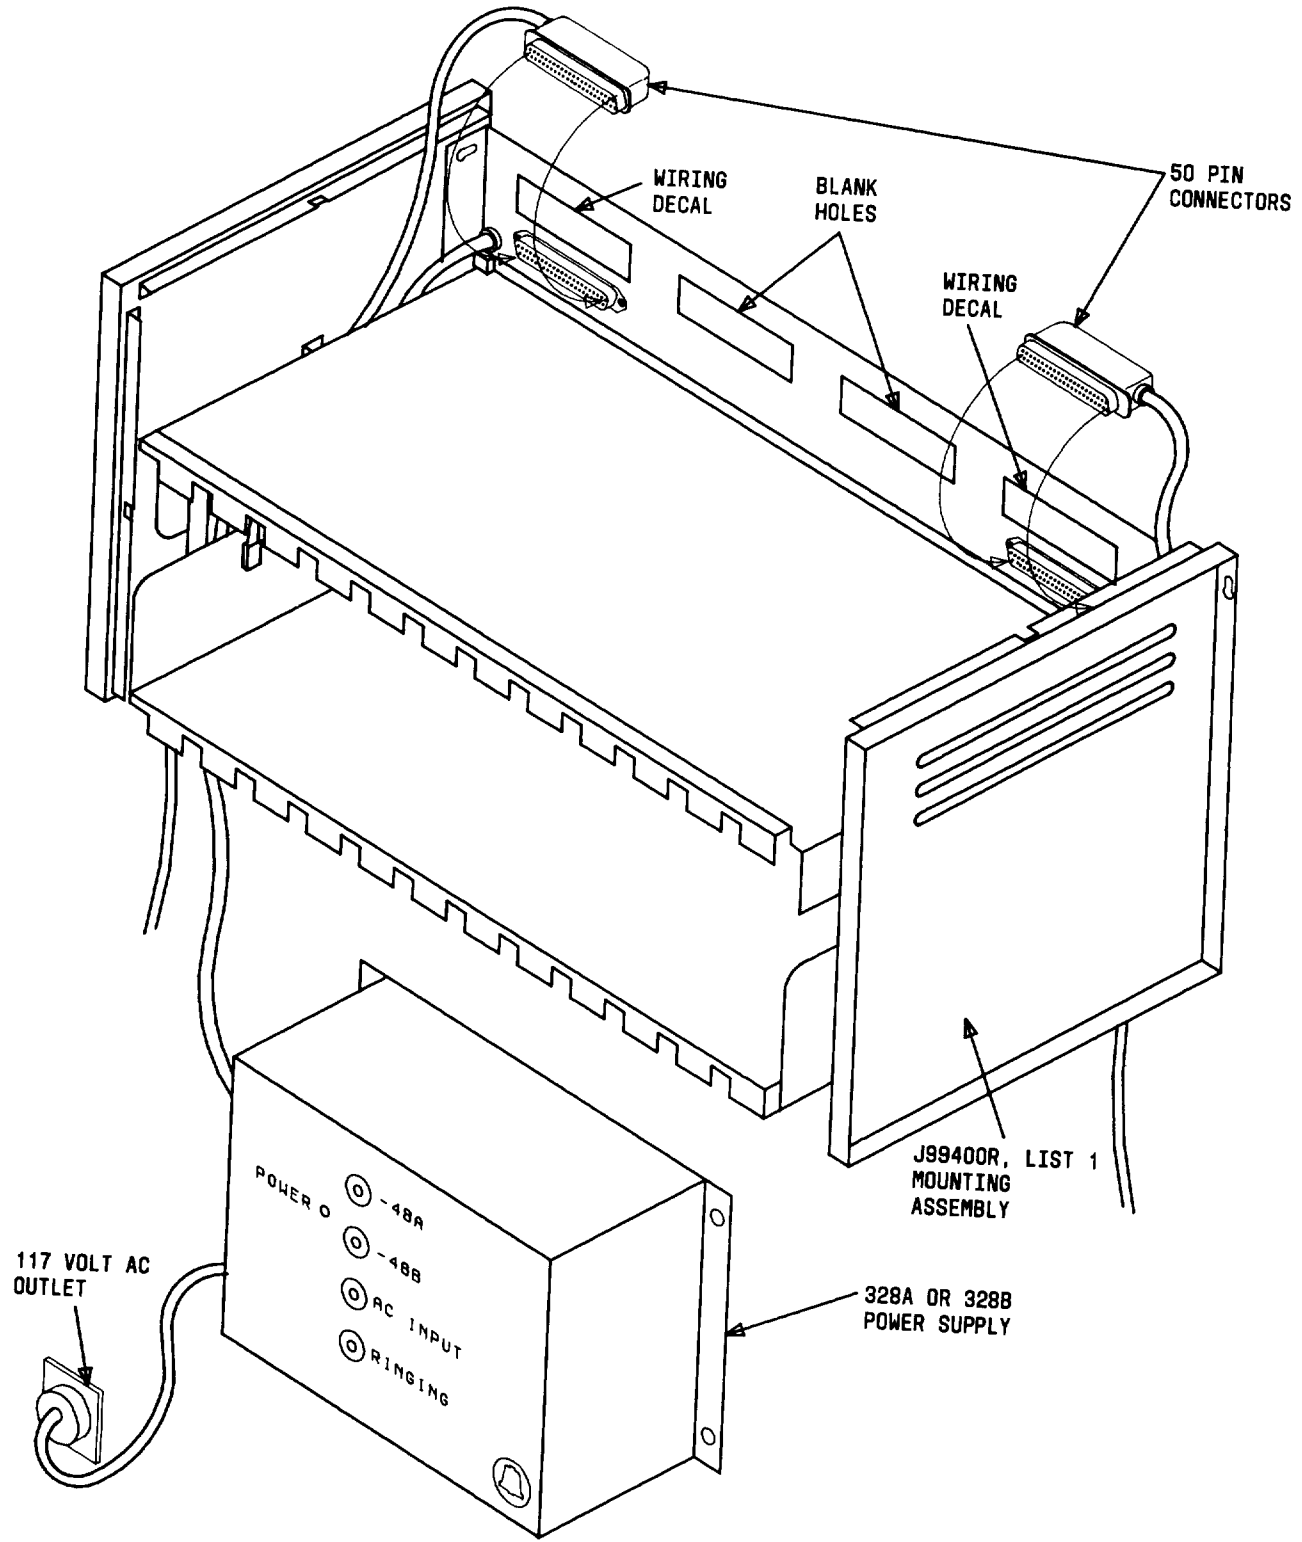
J99400R Housing Assembly—Double-Module Arrangement for Six MFT Circuits
